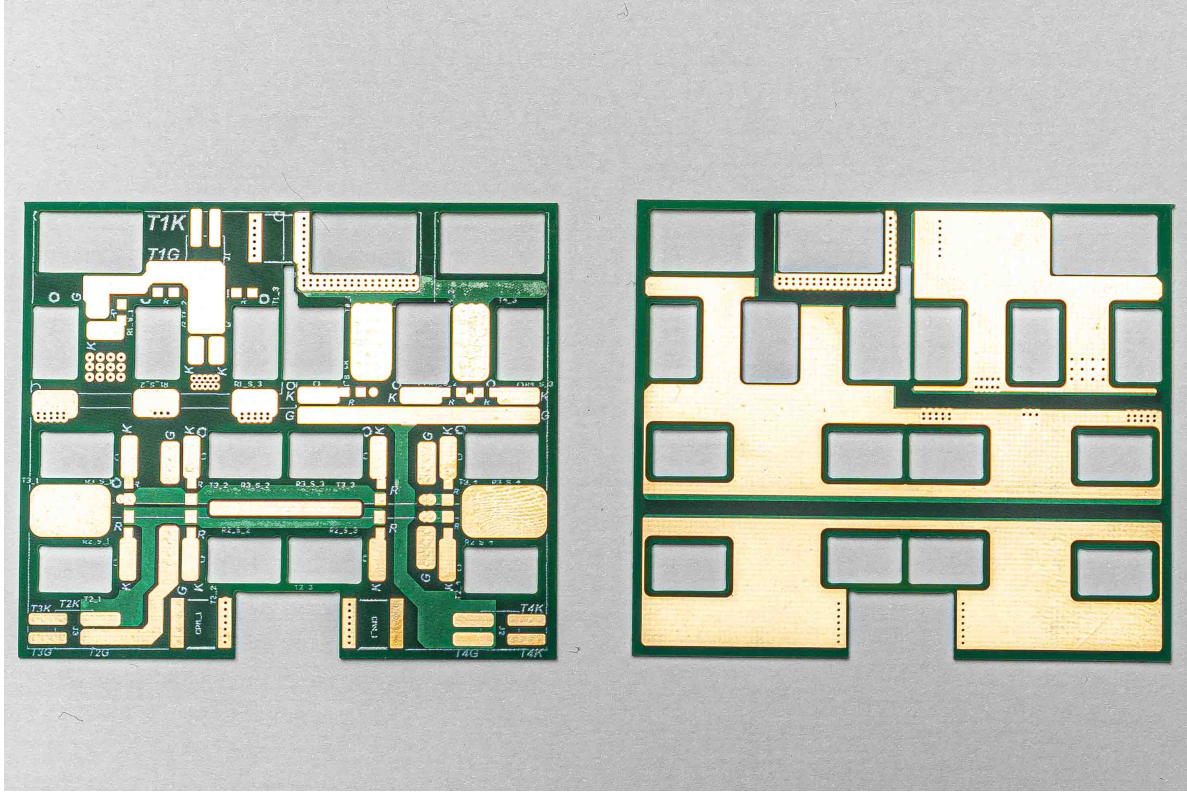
The pattern of designed PCB for the 3L-TNPC power module. Left: top side; Right: bottom side.
